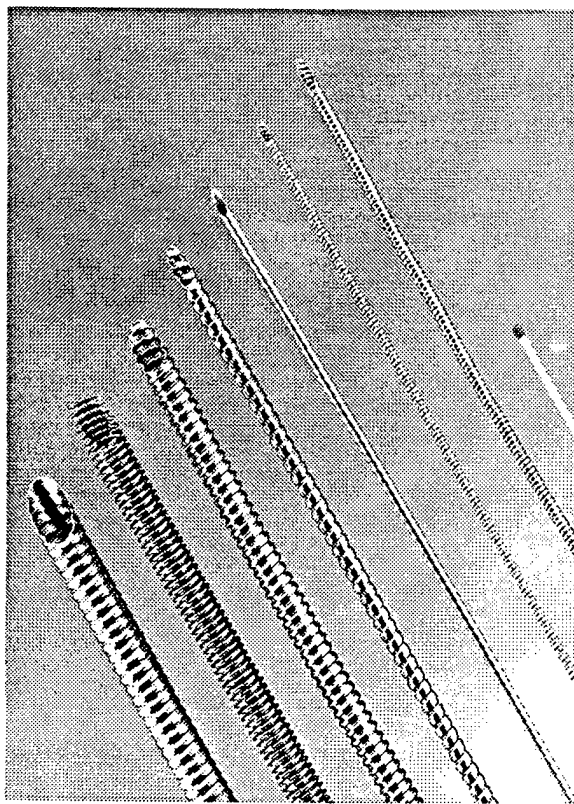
Laser-welded and corrugated metal tubes (CMT)
